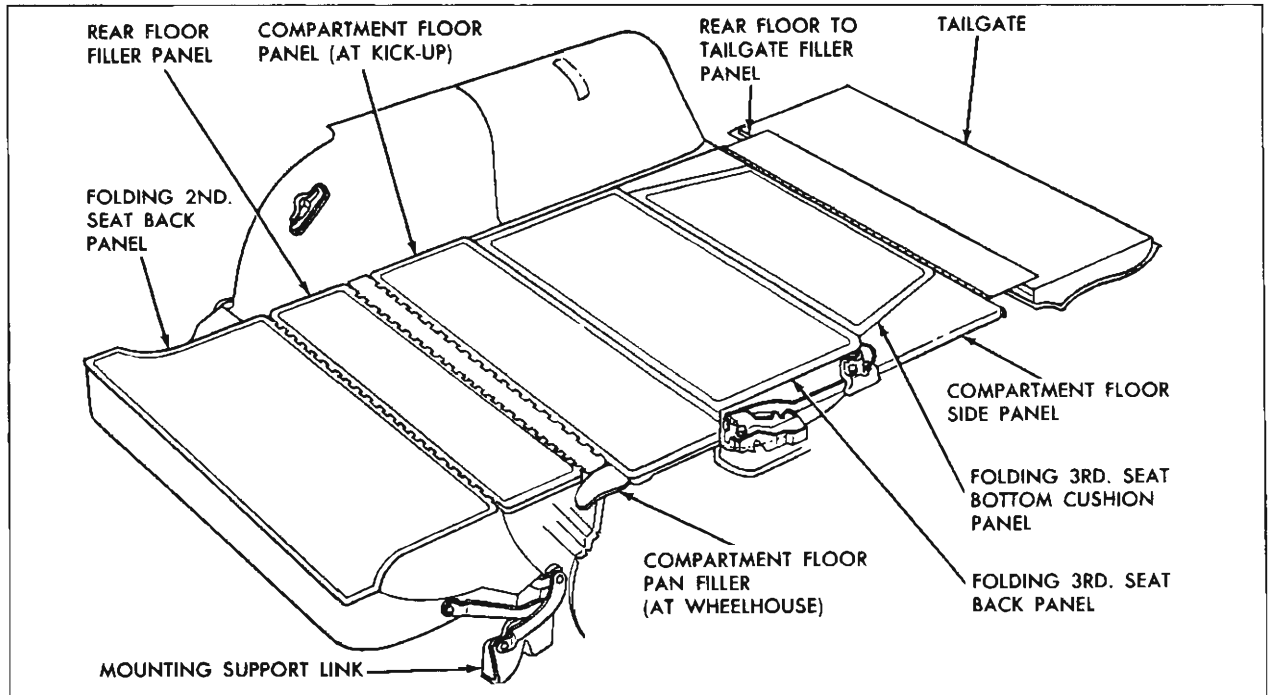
Folding Seat and Rear Compartment - 9 Passenger
